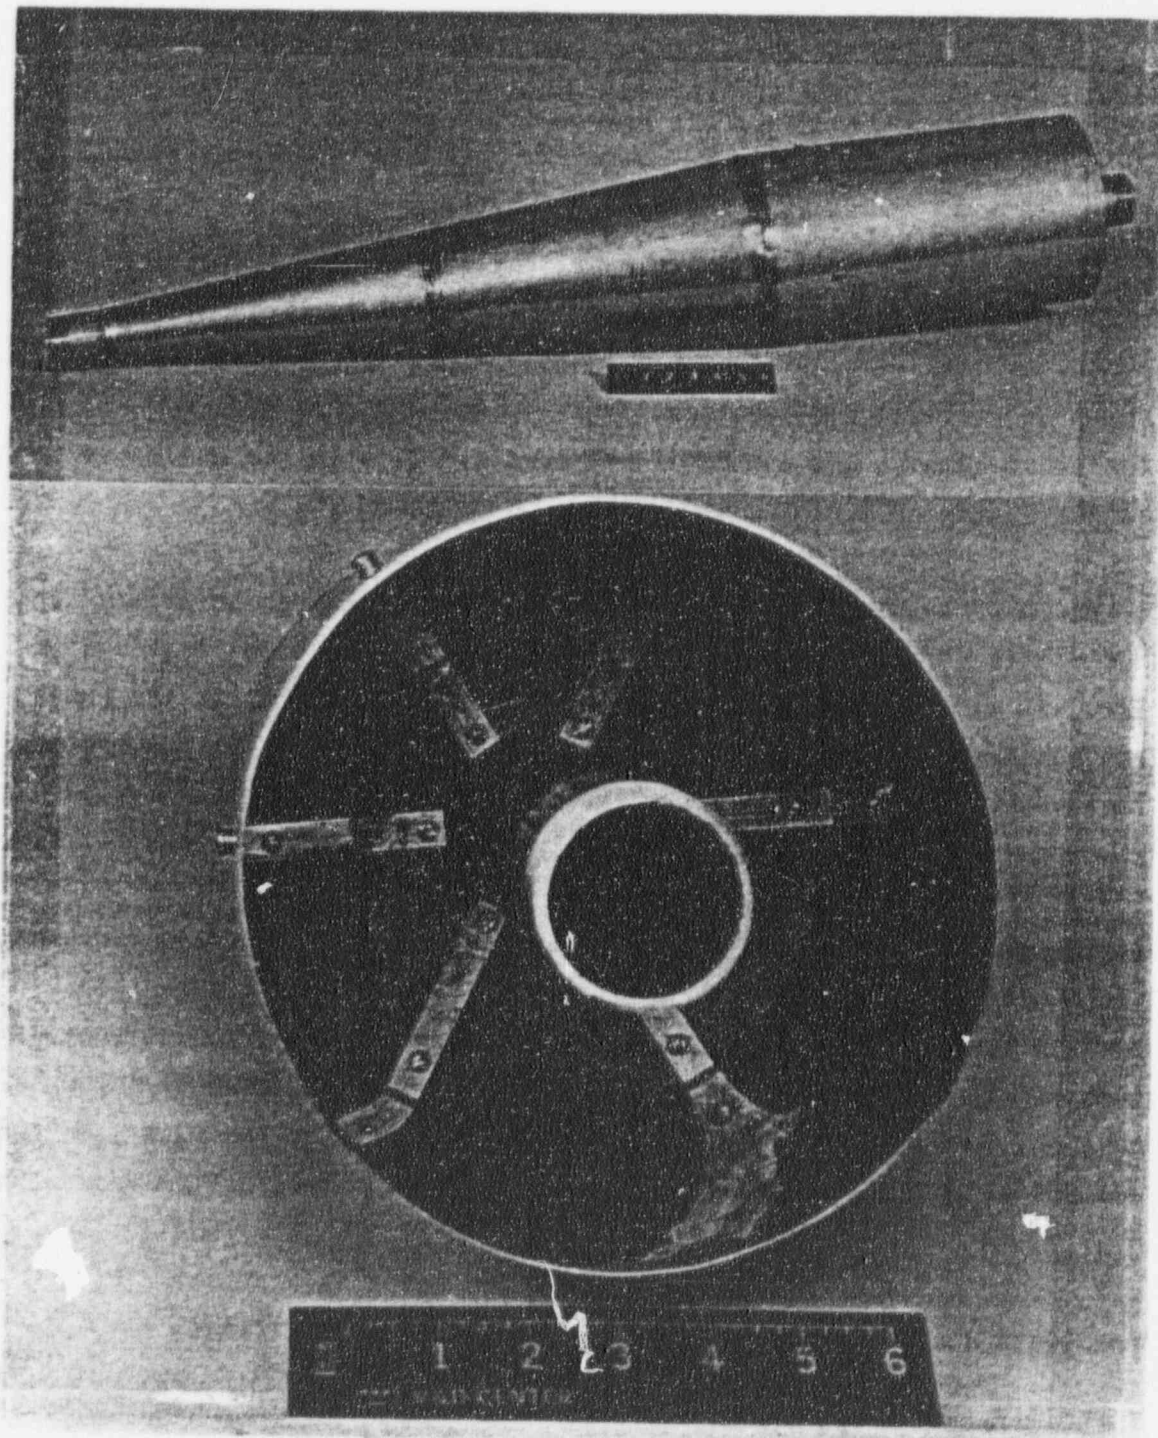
Side and Top View of Prototype Steam Distributor
